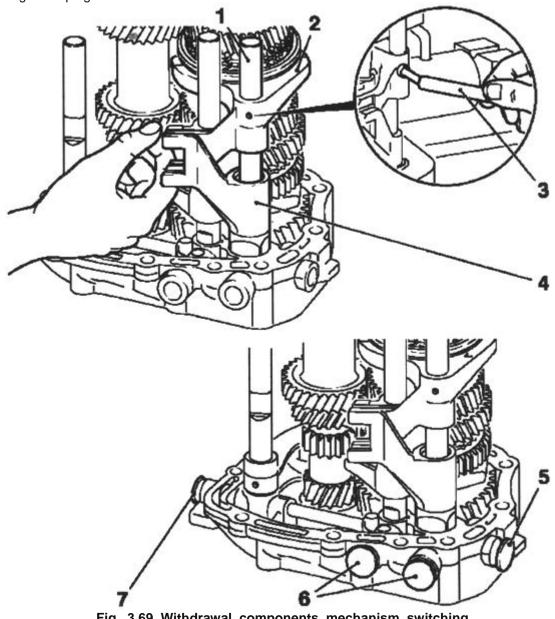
Withdrawal components mechanism switching 5 - th transfer:
